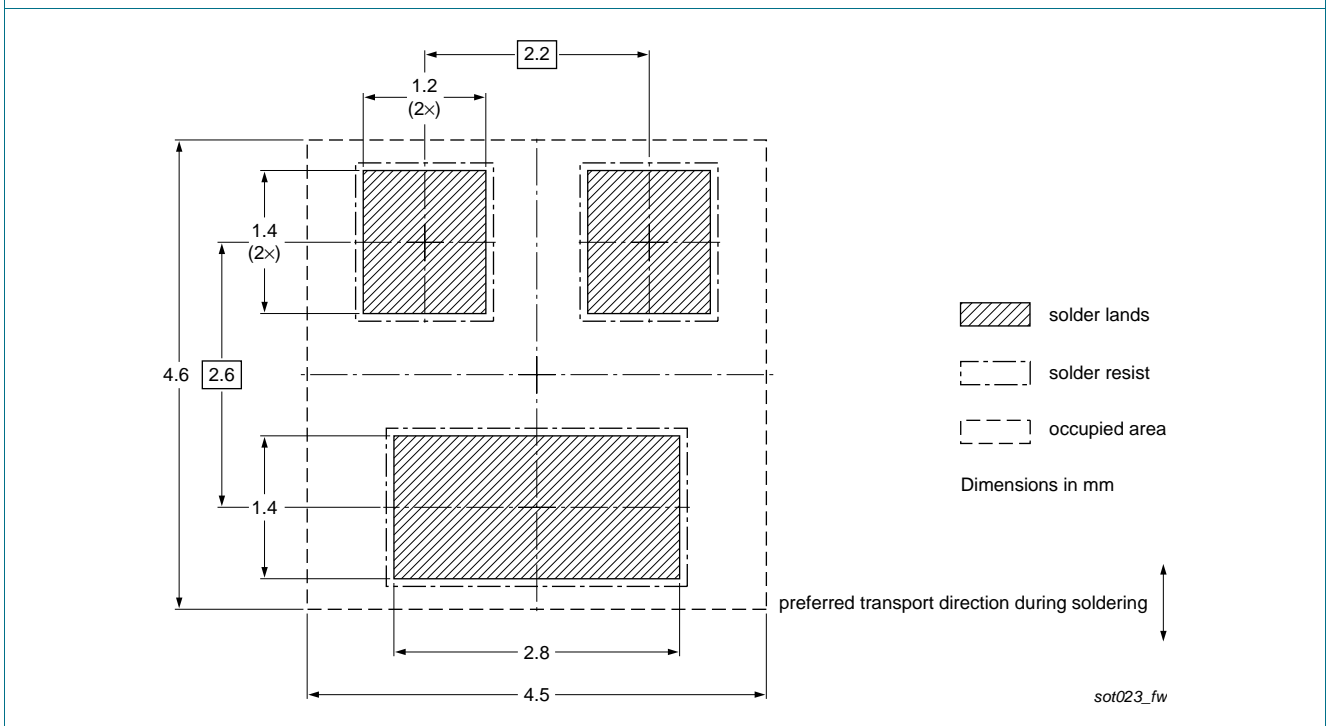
Wave soldering footprint for SOT23 (TO-236AB)
